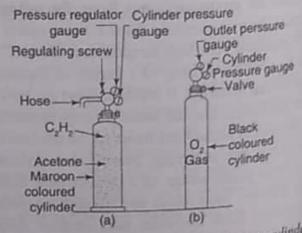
(a) Acetylene cylinder (b) Oxygen cylinder
